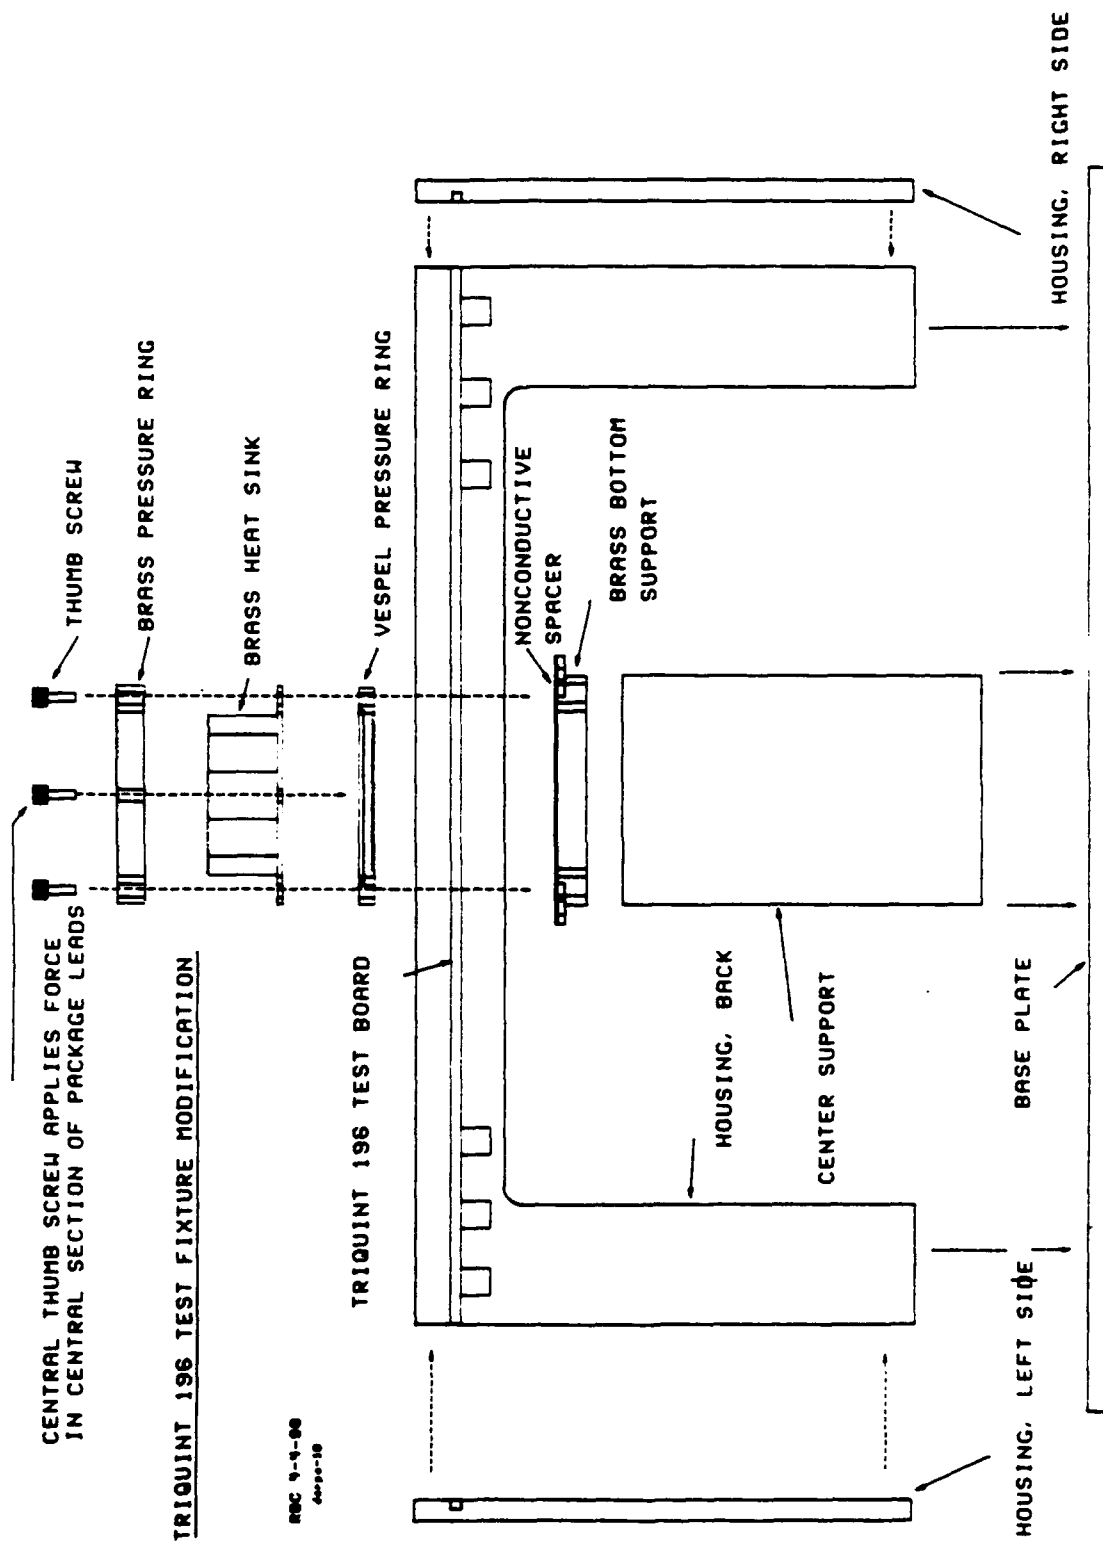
Clamping Mechanism for TriQuint 196 Package Testing
